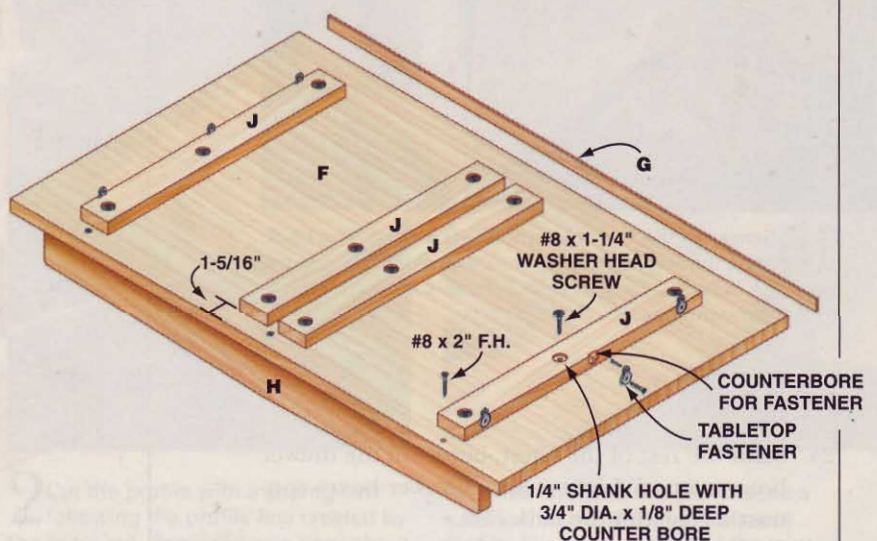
FIGURE F BOTTOM VIEW OF TOP ASSEMBLY
